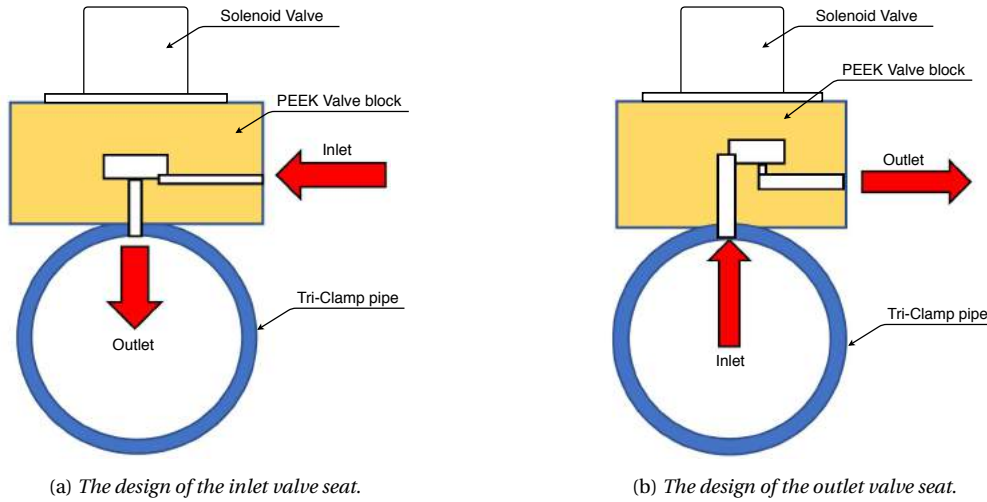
Schematic of the PEEK valve seats employed for initial valve system design.
